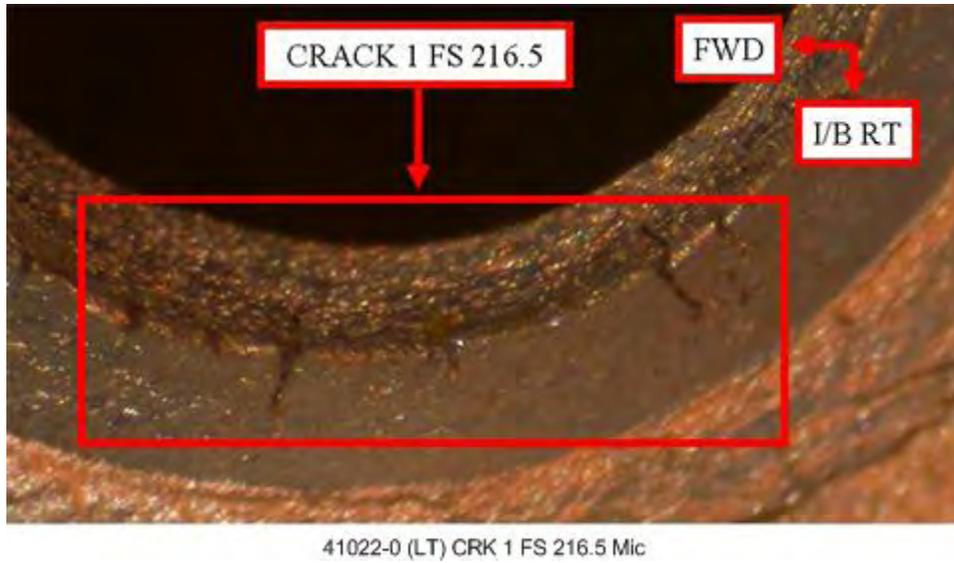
Microscopic View of Crack 1 on the Left Inboard Floorboard Support Assembly FS 216.5
